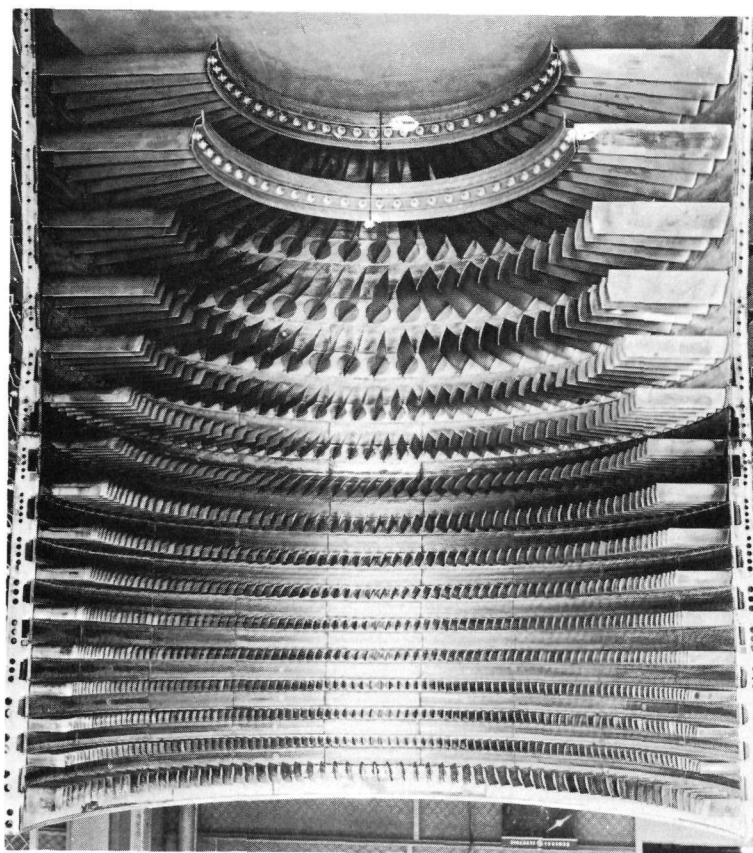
Compressor stator assembly (Neg. 254544)
